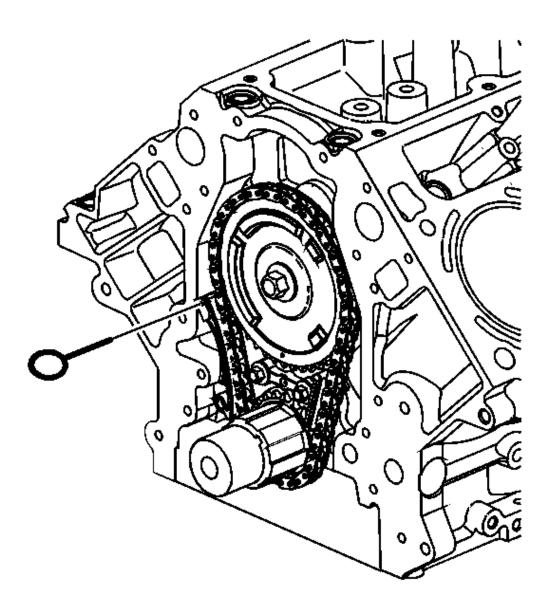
Locating Tensioner Pin Courtesy of GENERAL MOTORS CORP.
